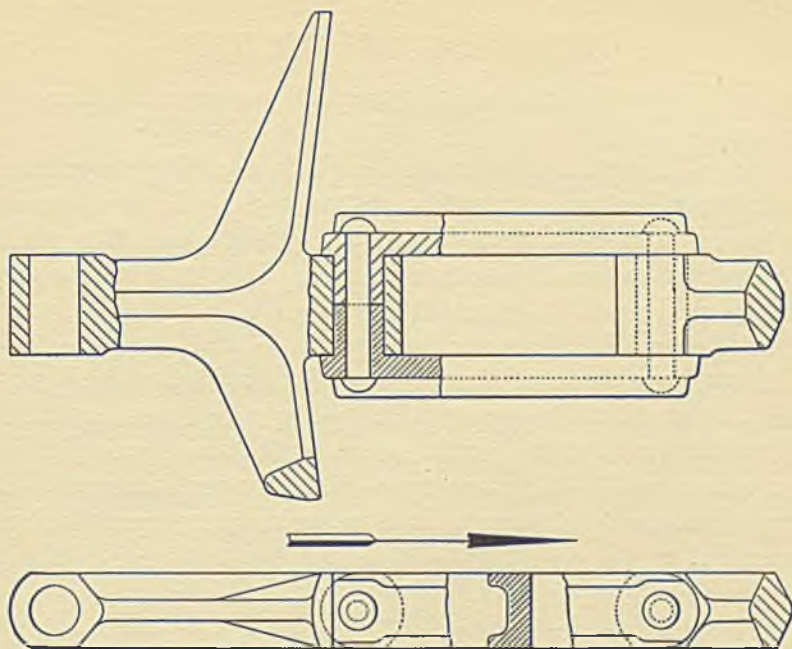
Diamond Coal Conveyor Chain, New Type.
